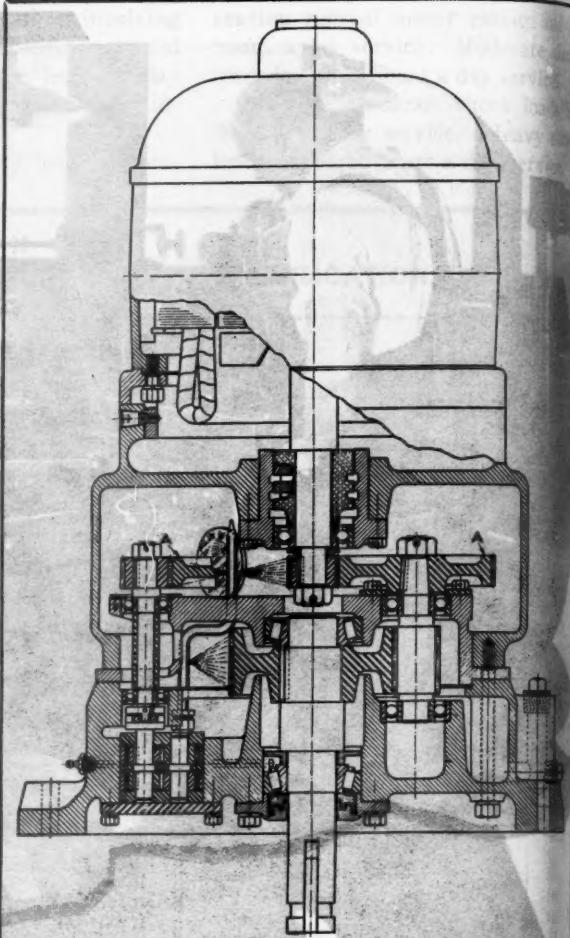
Vertical integral gearmotor with double reduction gearing. Reversible pump supplies spray of oil to gears and bearings.
